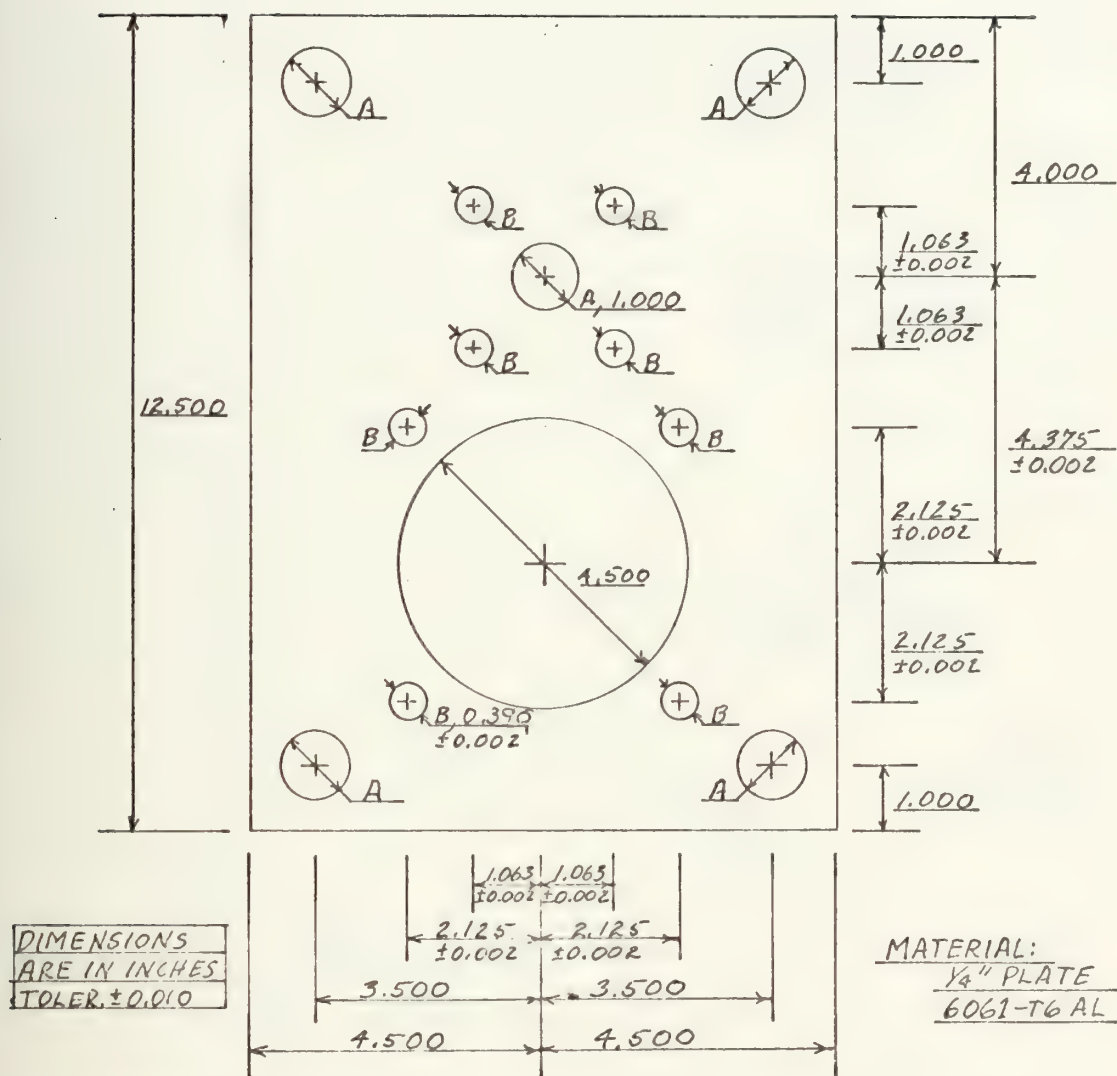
PIECE IV-2-3, MOTOR MOUNT PLATE
